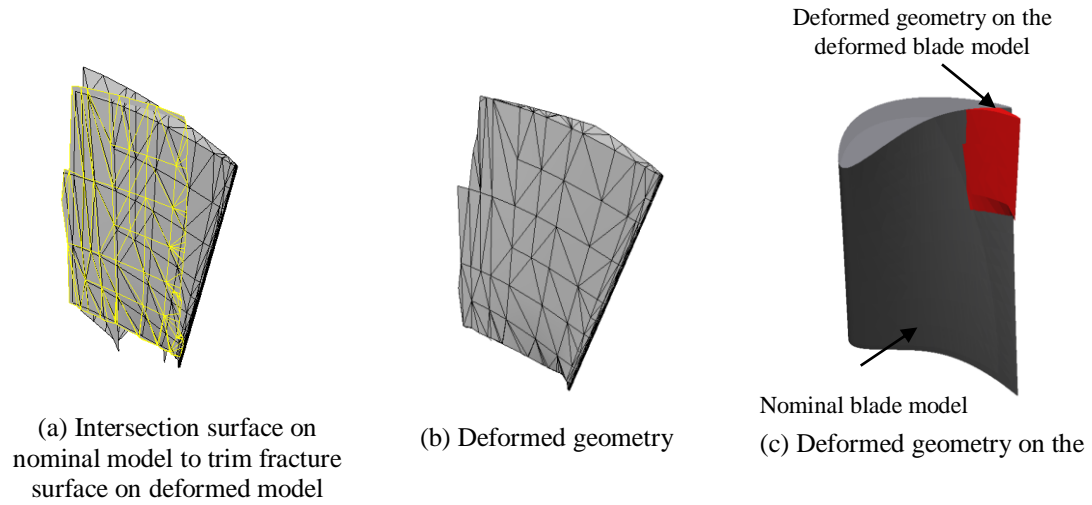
Intersection surface trim fracture surface on deformed blade
